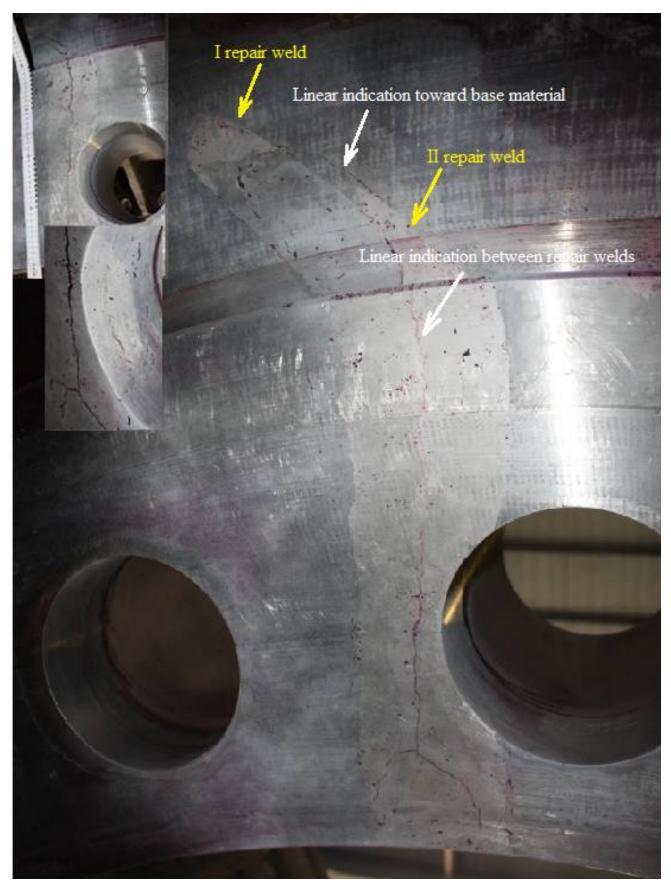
Cracks in the area between weld metal and base material of the hub; between two repair welds; and between openings for bolts nr. 5 and 6.
